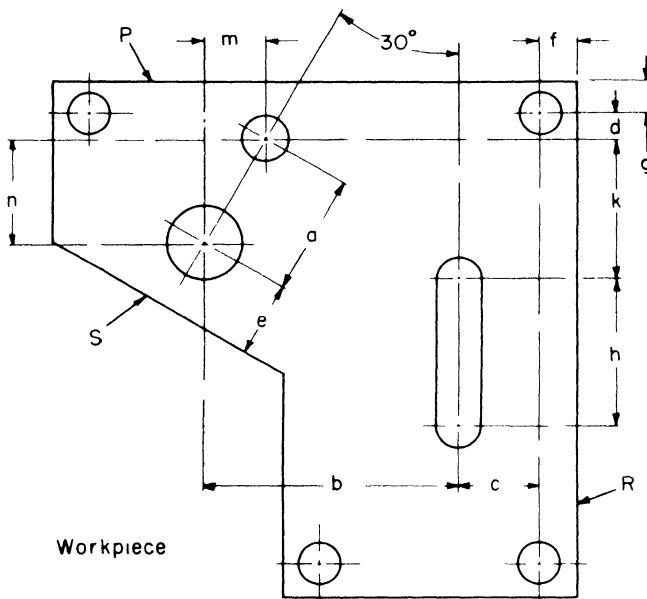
Flat work-piece showing various dimensions that must be measured or calculated from other measurements.
